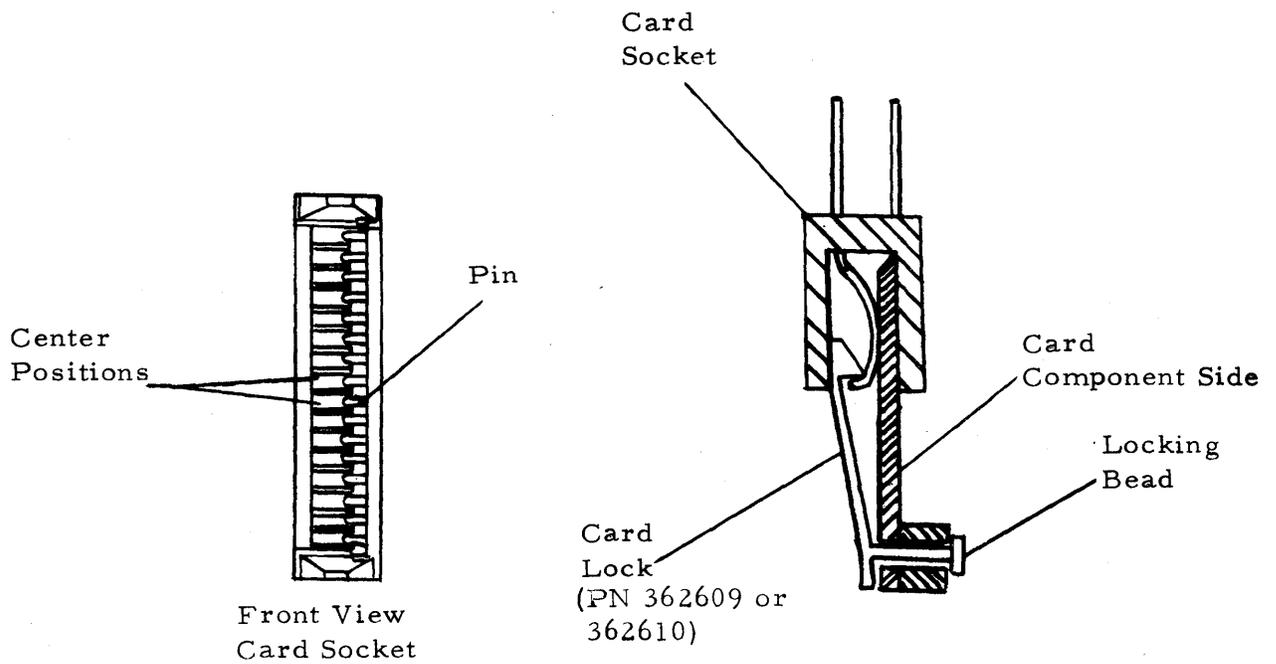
TAMPER-PROOFING PADDLE CARDS
